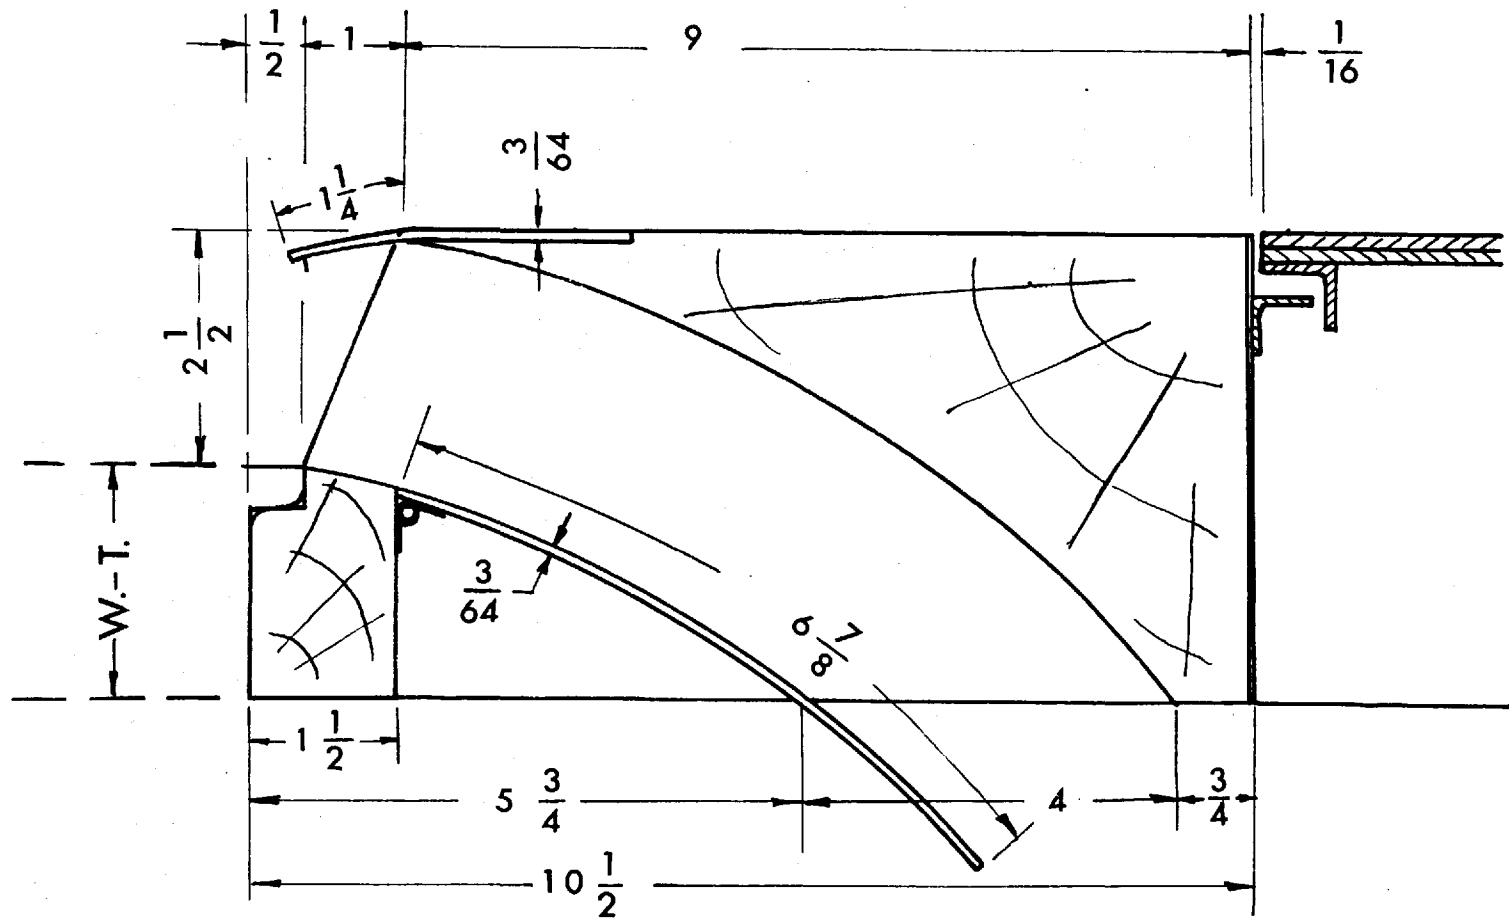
Detail of bleed for tunnel-wall boundary layer .
